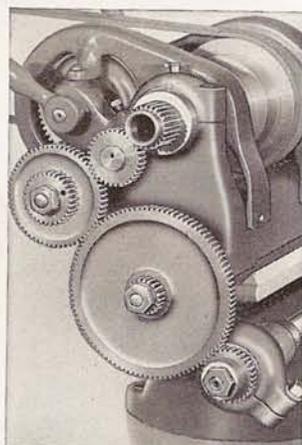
Gear Arrangement for Cutting Left-Hand Screw Threads.
